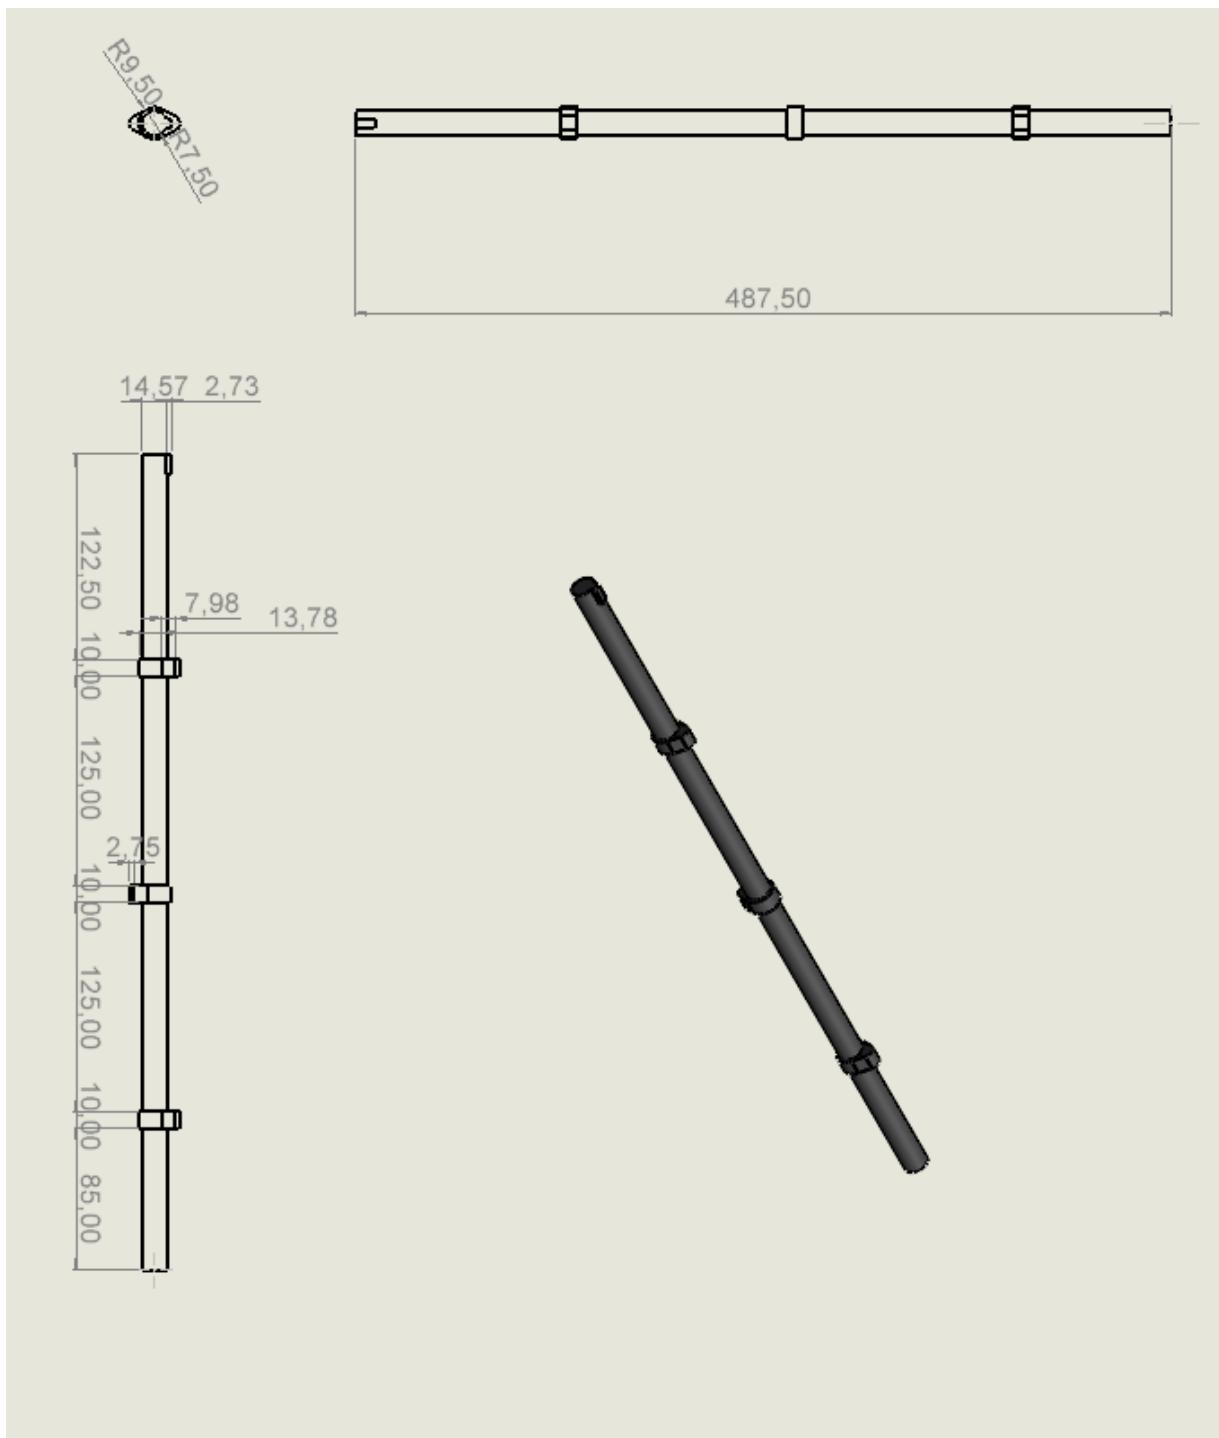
Technical Drawing of Exhaust Valves Camshaft.
